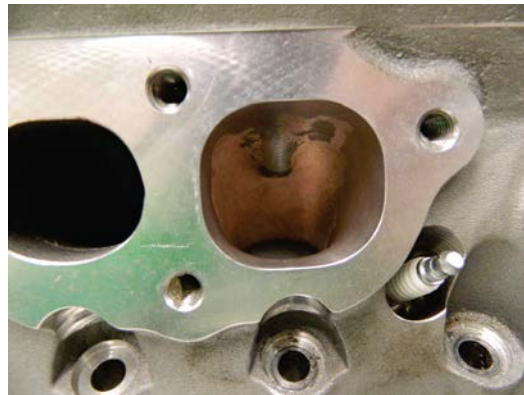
Modified Weld Tech GPTech 1 Port.
